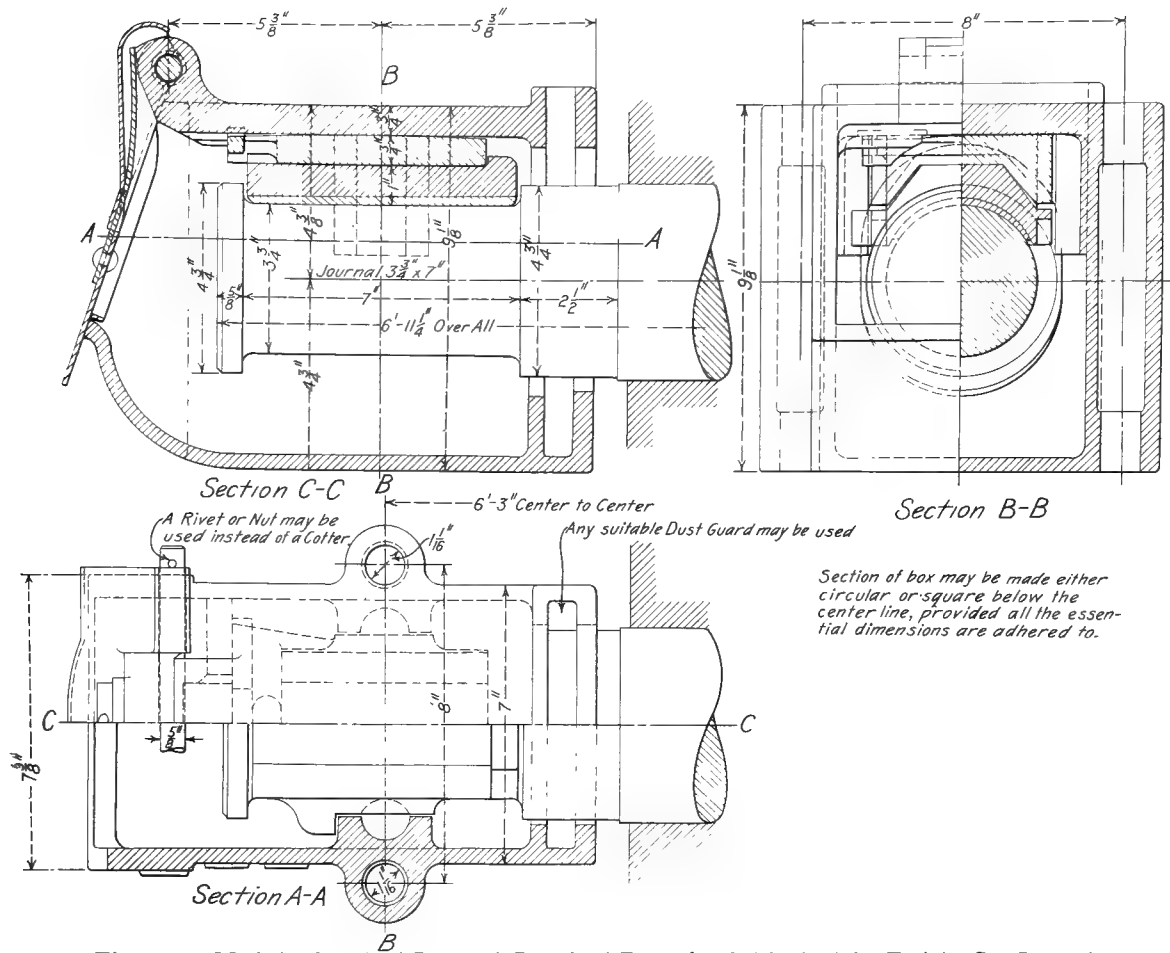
M. C. B. Standard Box and Contained Parts for 3 3/4 in. by 7 in. Freight Car Journal. (M. C. B. Sheet 1.)
